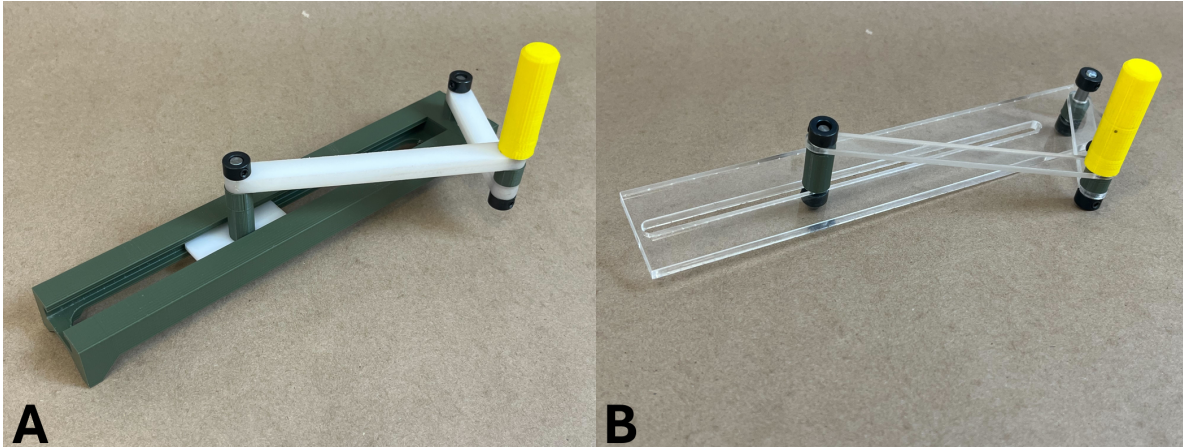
Crank-slider assembly task with well designed slider (A) and poorly designed slider (B)
